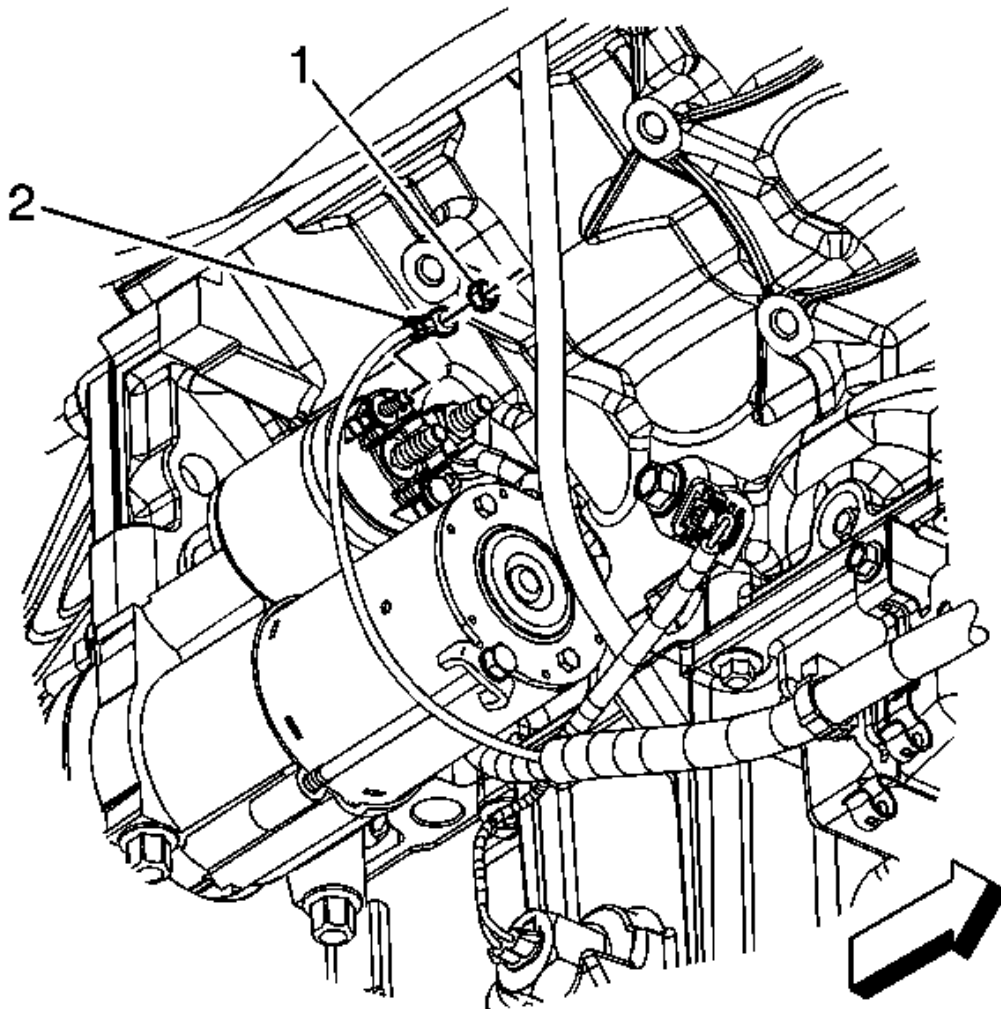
View Of Engine Wiring Harness Lead Terminal & Nut
